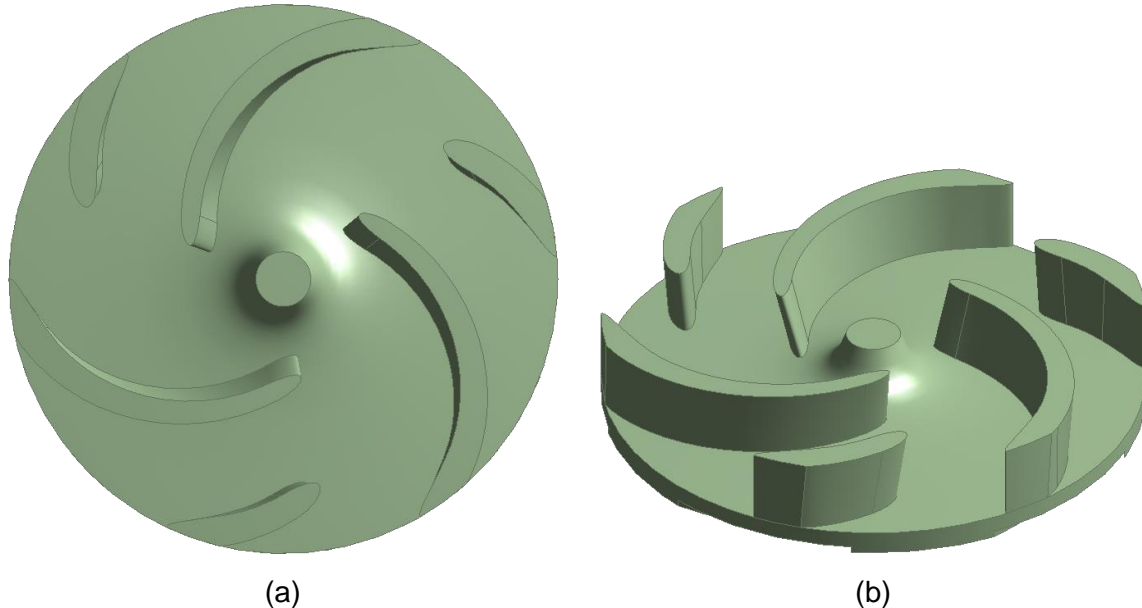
Impeller with splitter blades; (a) top view, (b) 3D view
